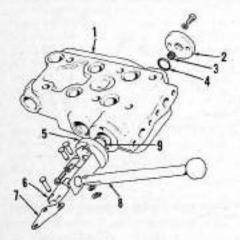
Exploded view of combining valve. Note valve spool is not shown.
